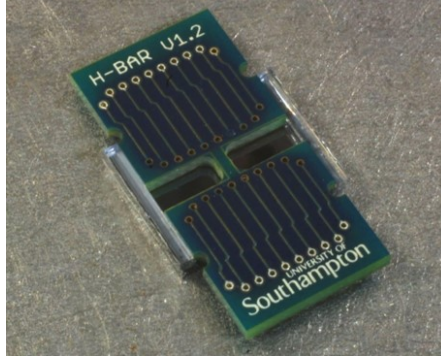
A prototype solder-bumped assembly without waveguides, the process was unoptimised, resulting in incomplete connectivity in this device.
